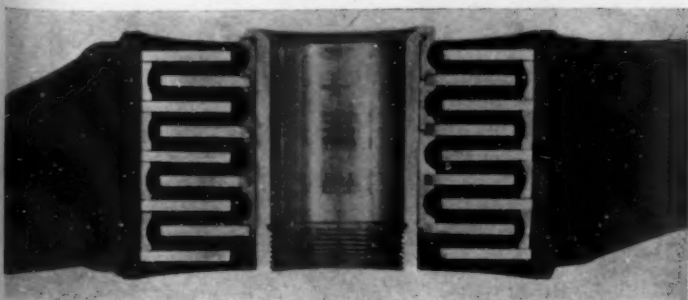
Dismantled flexible bearing, Me. 210 engine bearer.
